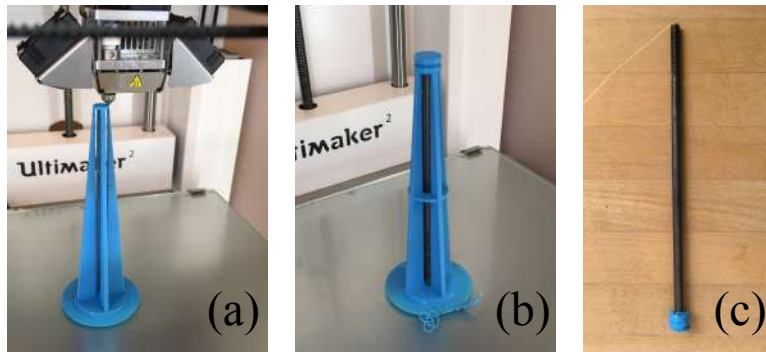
Images of Vertical Part Embedding and Piston Rod Assembly Design #1
